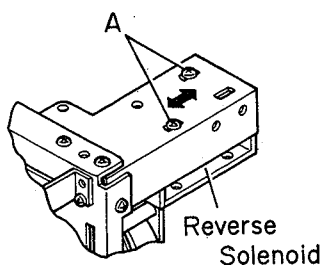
Reverse Solenoid Positioning Adjustment (1)
